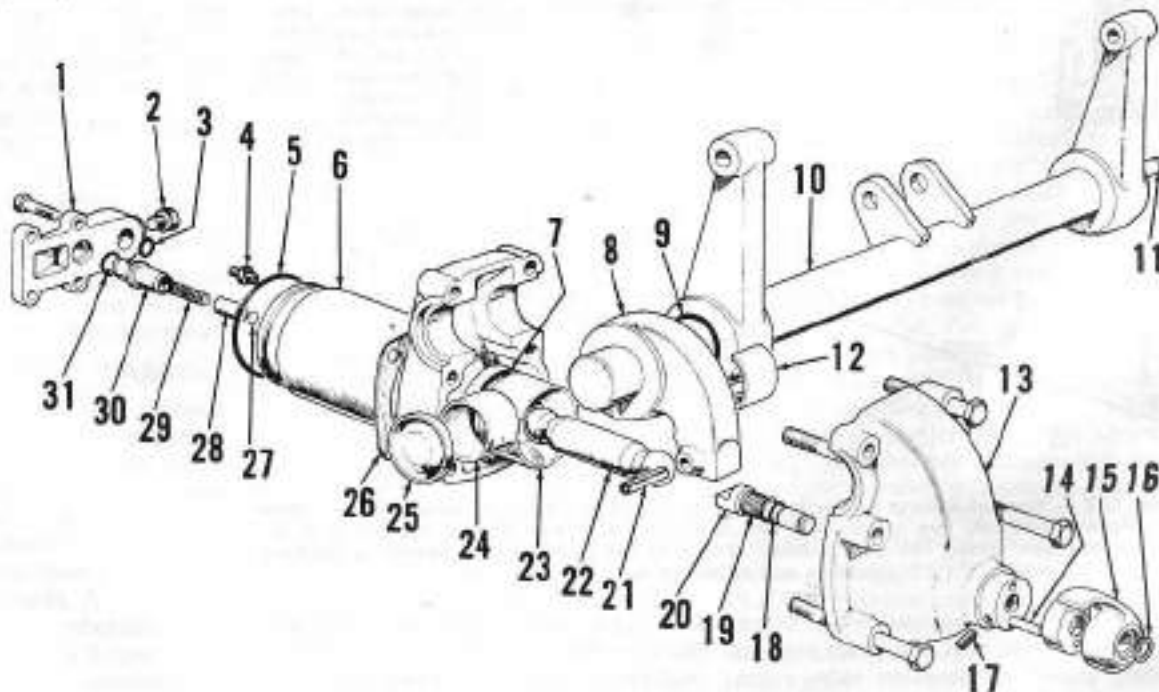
Exploded view of ram cylinder assembly with rockshaft. Latch (20) locks rockshaft in fully raised position. Pin (11) in right end of rockshaft (10) is pivot pin for automatic hold mechanism; see item 6, Fig. 160. Rockshaft is supported in renewable bushings (12 and 24 shown above and 2—Fig. 160).
